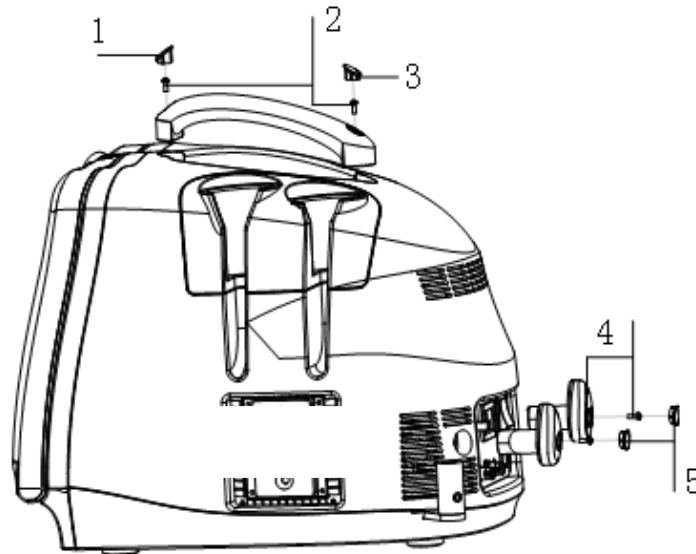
Sketch Map of Handle and Winding Rack Disassembly
